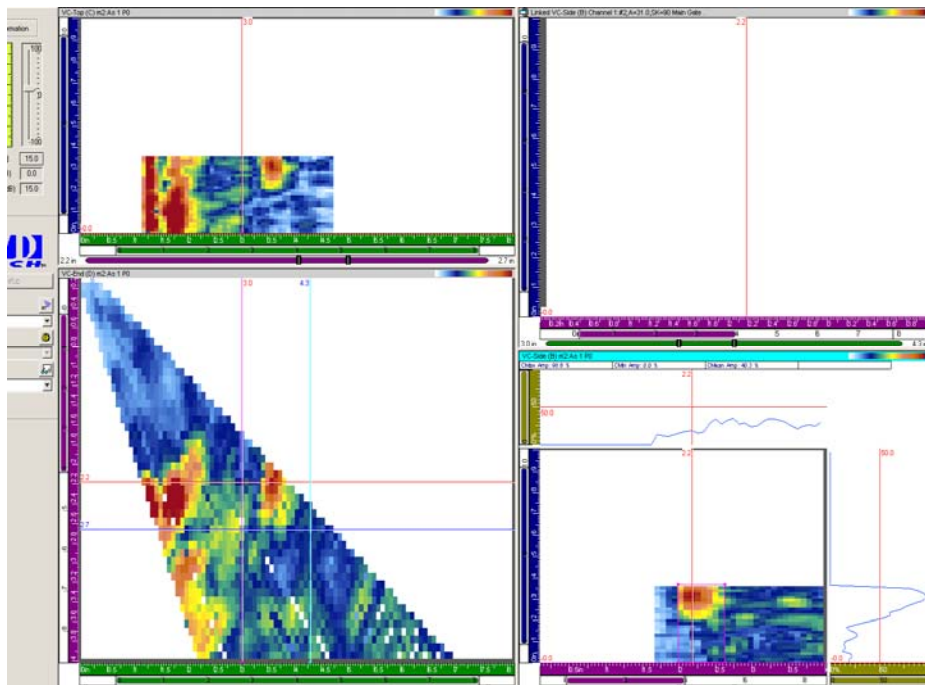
B505 Inspected from the Equiaxed Side of the Weld with Merged Data, Showing a Yes Detected
